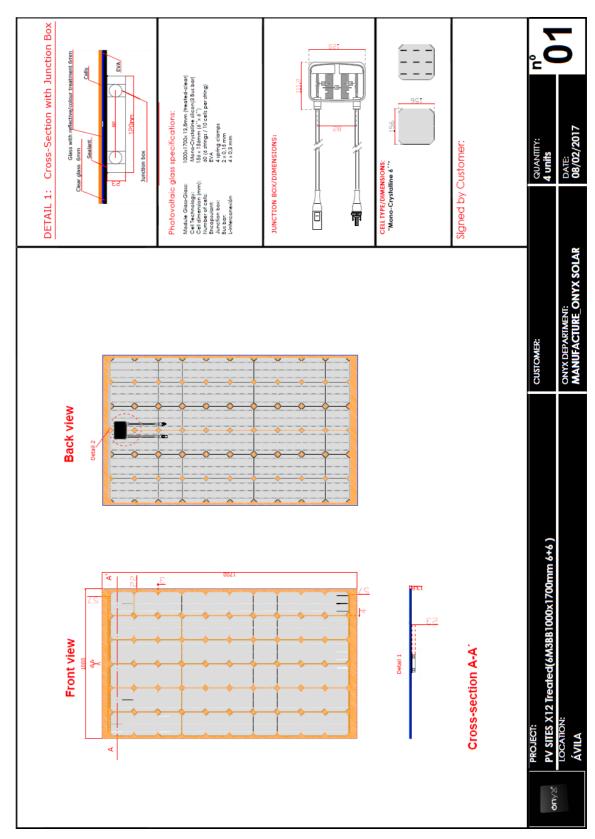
Manufacturing drawing of samples X12-1, X12-2, X12-3 and X12-4
